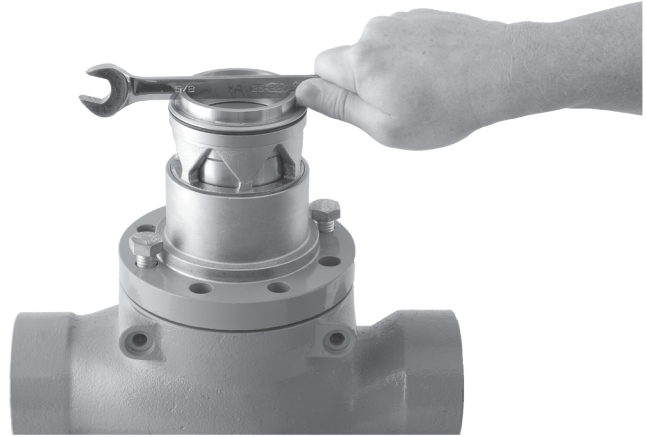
Seat Ring / Cage Removal Using Body as Holding Fixture
